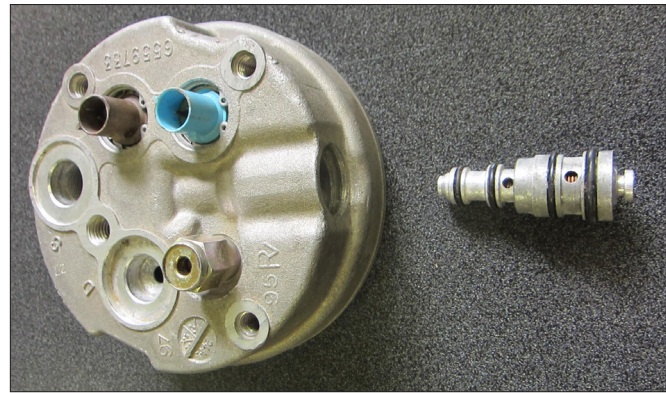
The control valve is mounted in the rear head of the compressor and can be mechanical in design or electronic (Figure 15). Another "clue" to identifying a variable displacement compressor is the casting bulge to accommodate the valve.
